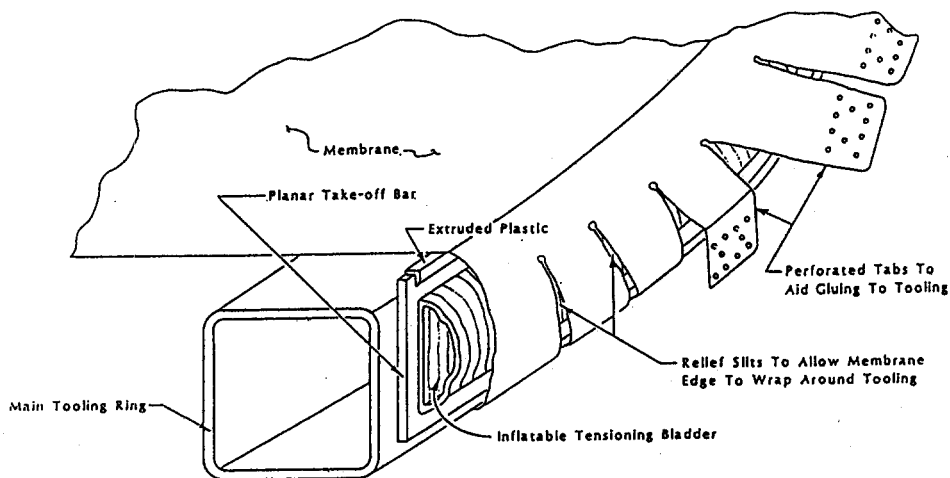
Membrane Tensioning Technique Using Bladder on Outside Circumference of Tooling Ring.
